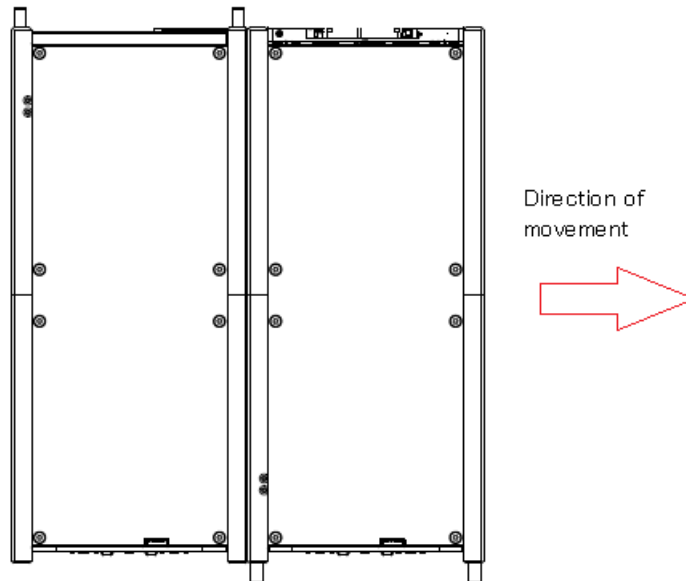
Draft of 2-by-2 design (dimensions in mm)
